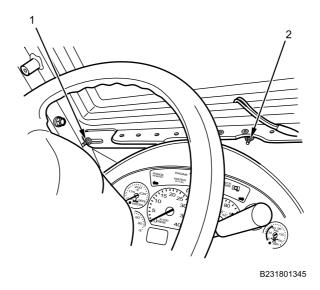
Cross-Vehicle Equipment Bracket Nut Left Side Interior Locations.
